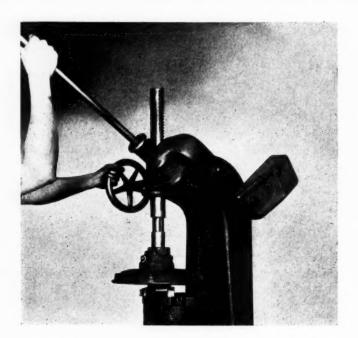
Recommended Method of Pressing a Sleevebearing Shell out of or into a Motor Bracket
